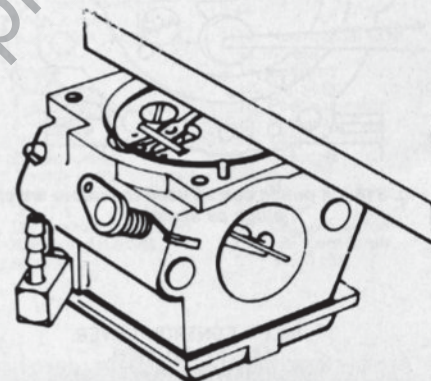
Diaphragm lever on Model HDB or HDC should just touch a straightedge laid on carburetor body as shown.
